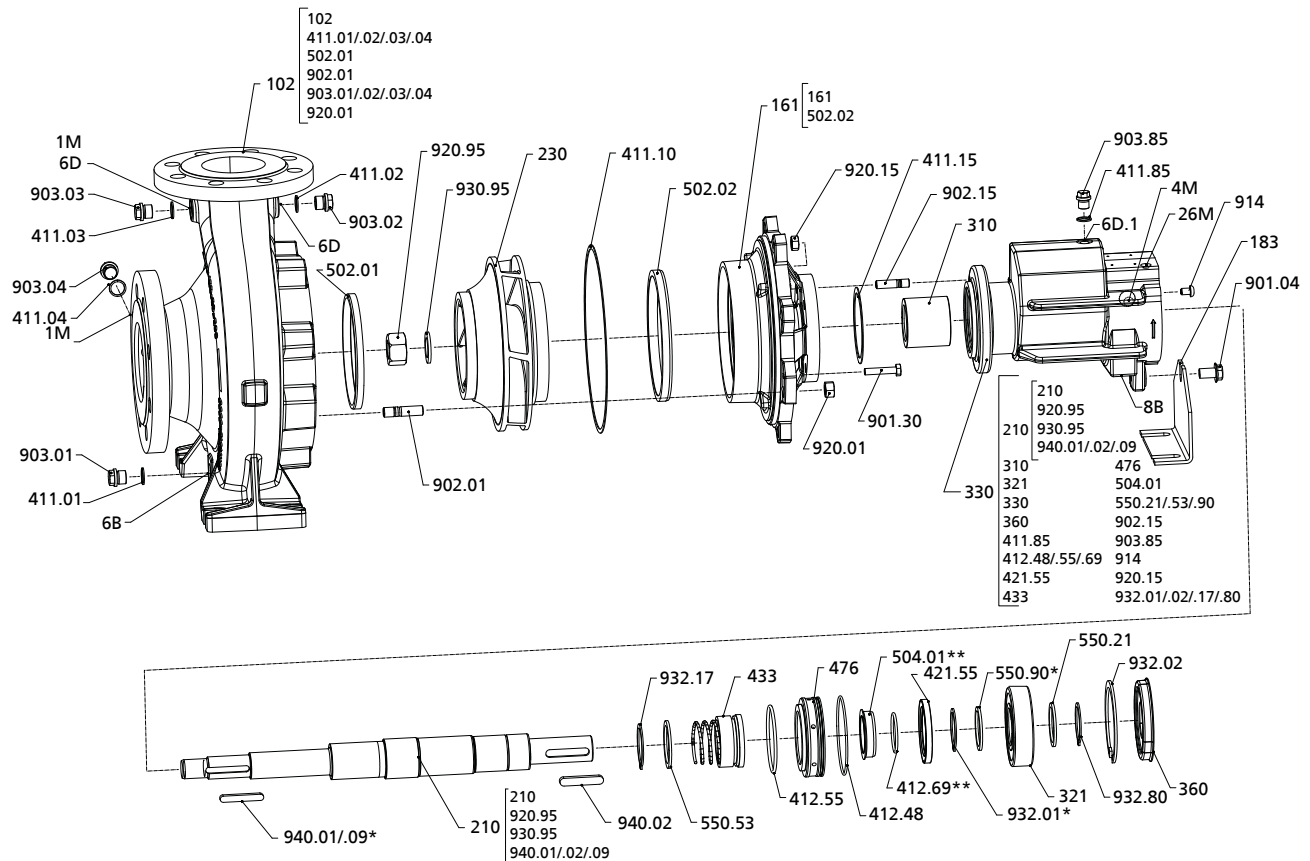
Exploded view of an Vlety; bearing bracket WS\_25\_LS with double mechanical seal
